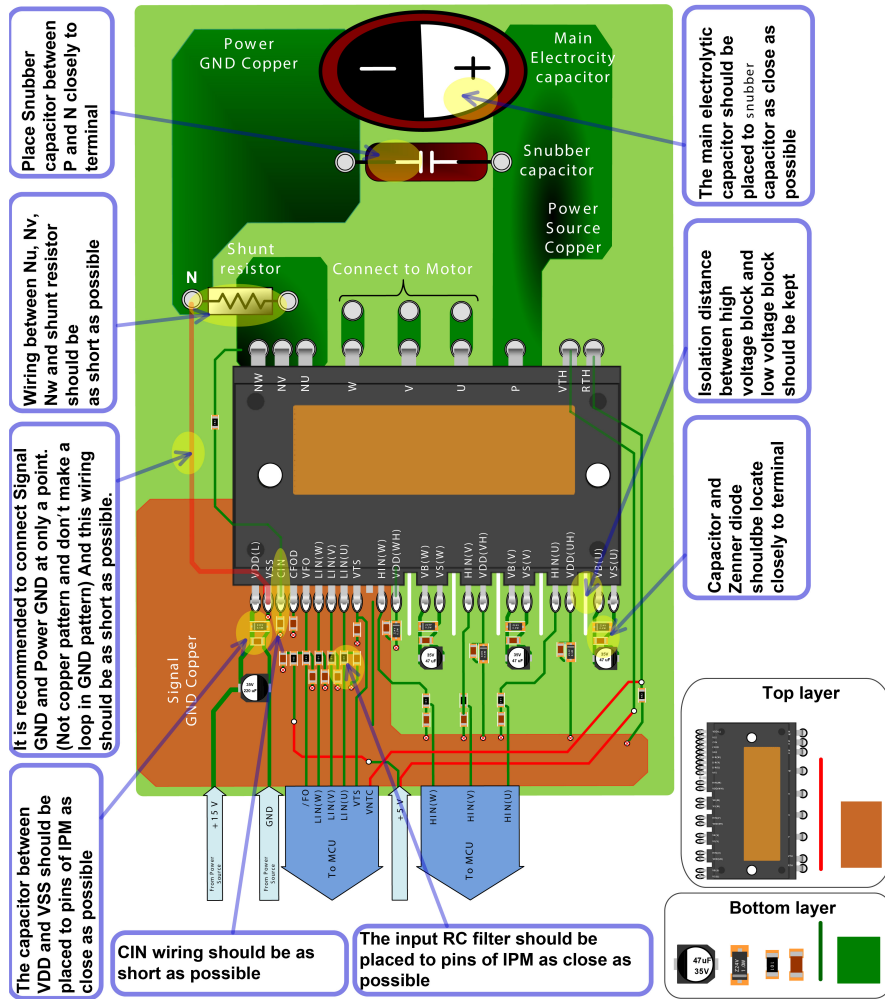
Print Circuit Board (PCB) Layout Guidance for SPM 31 Series
